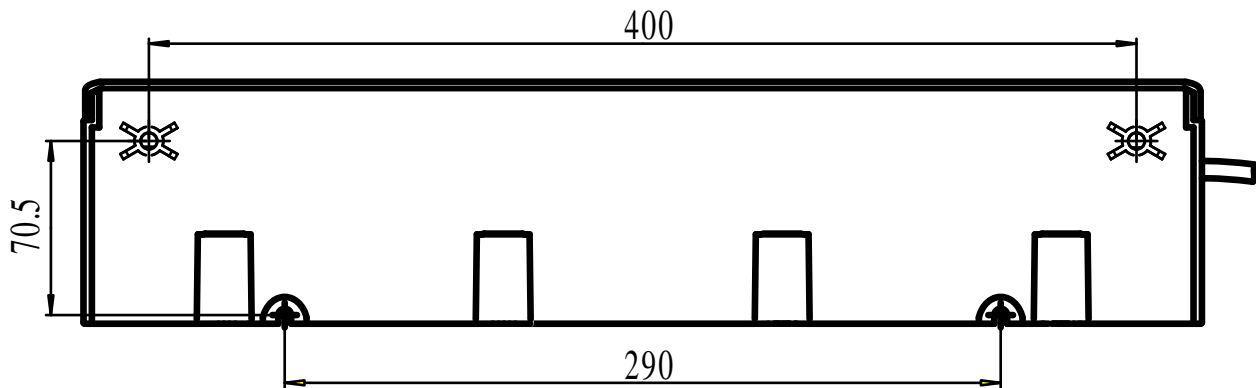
Mounting dimensions in mm - Charging Rack seen from back
